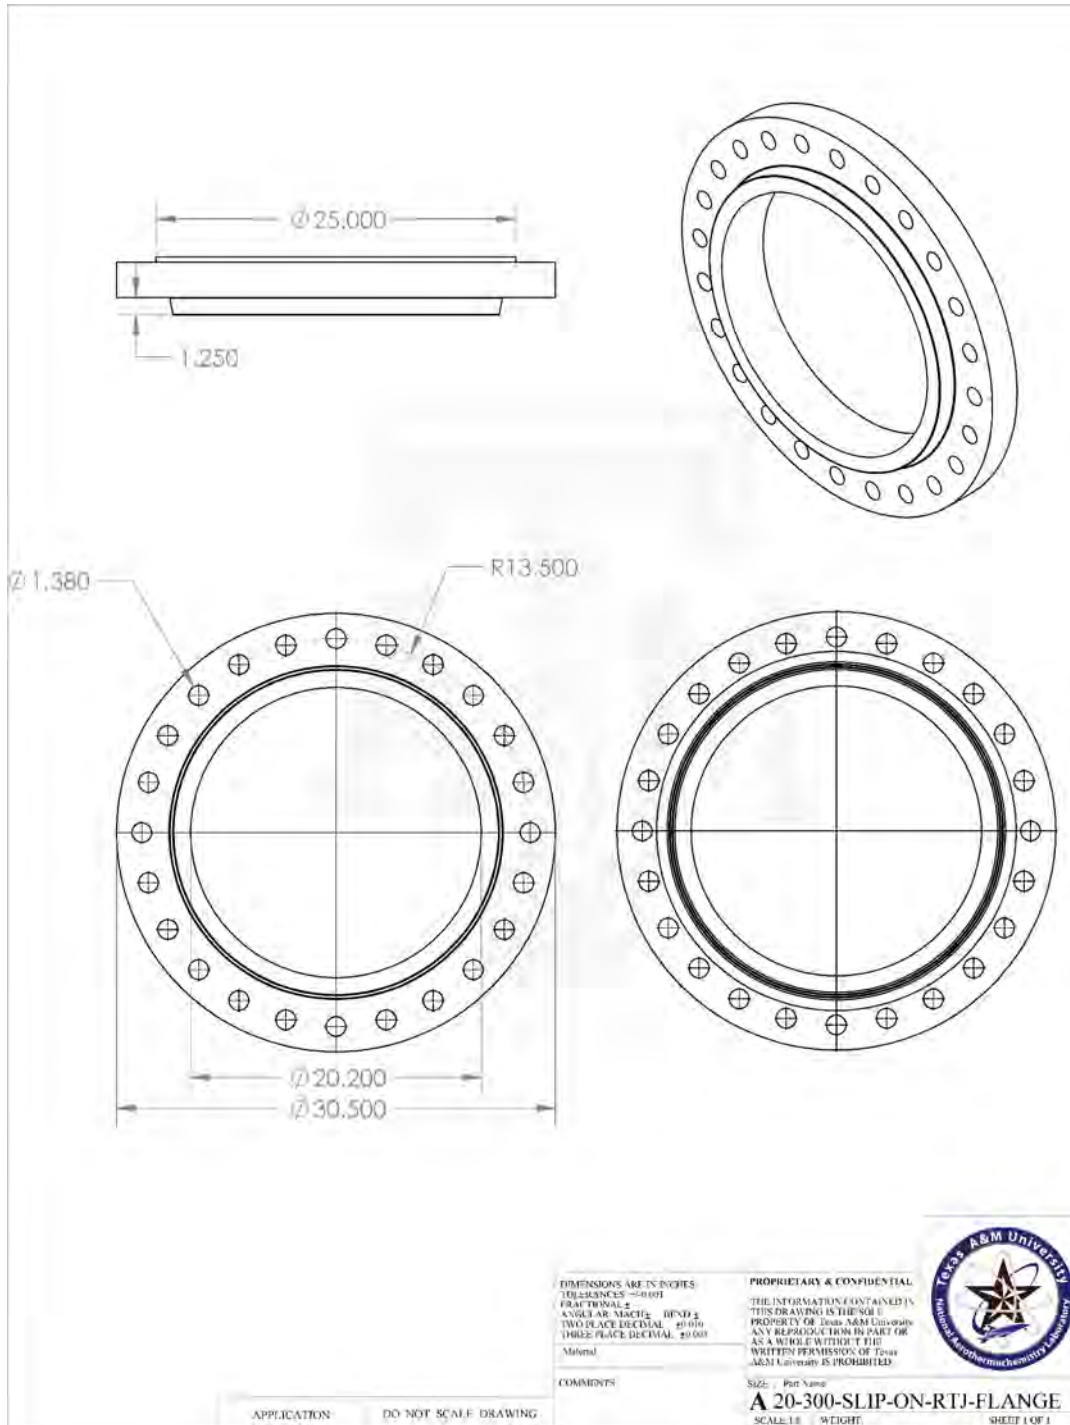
DIMENSIONAL DRAWING FOR A 20-IN CLASS 300 RTJ SLIP-ON FLANGE.
